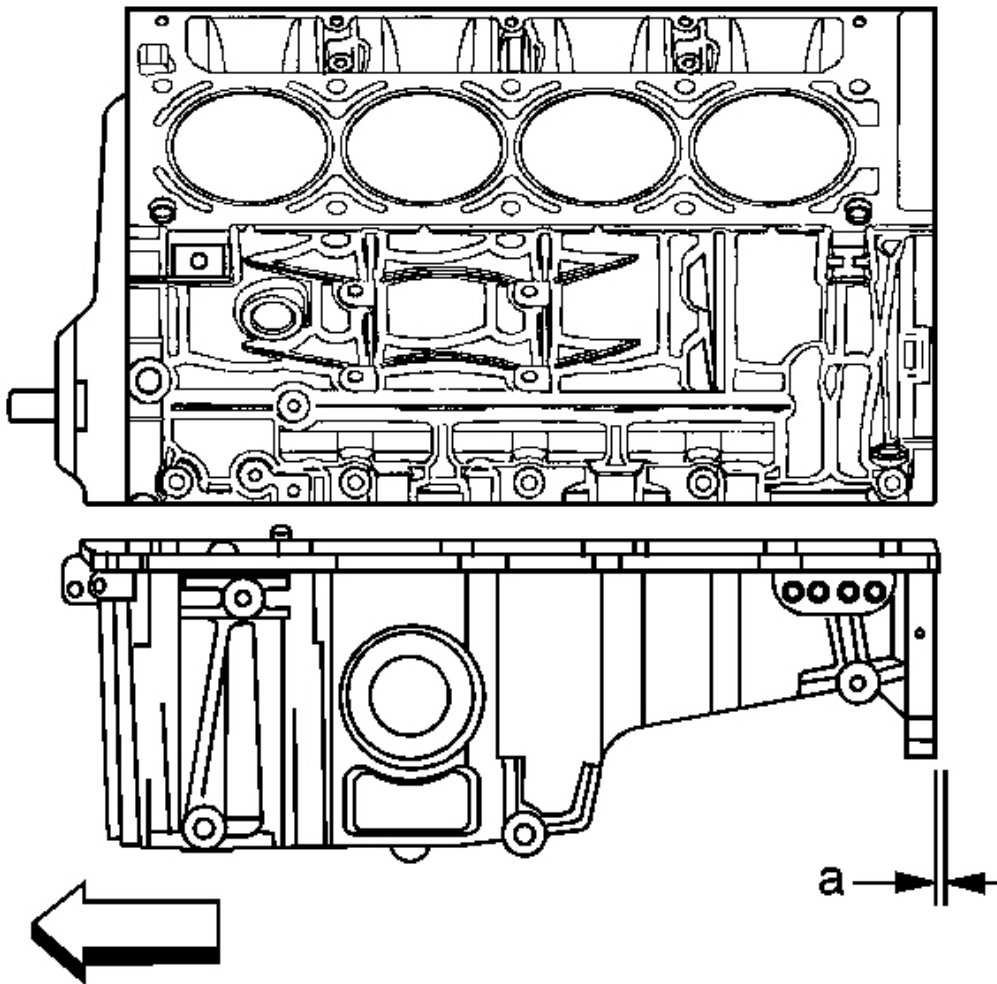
Aligning Rear Of Oil Pan & Rear Of Engine Block
